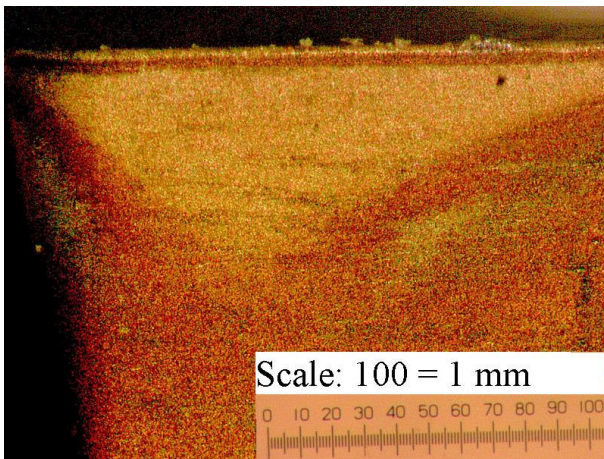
Picture showing flank wear for a dry cut after 1 minute of machining at a cutting speed of 190 m min⁻¹ and feed rate of 0.23 mm/rev with a 2 mm depth of cut [7]
